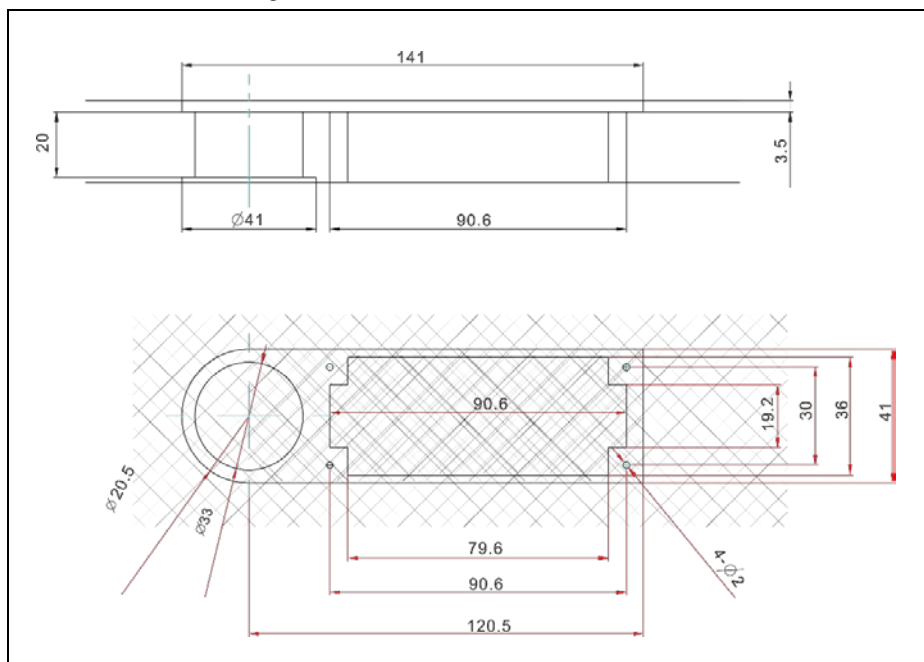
HCS-4827H&HCS-4827SELM combined installation hole drawing
